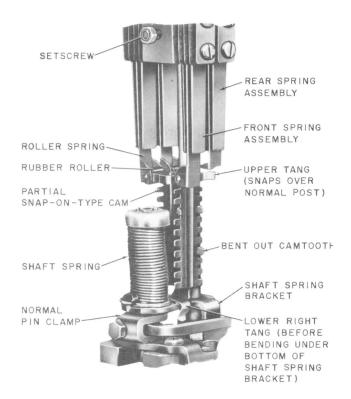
Normal Post Spring Assembly Having Rubber Rollers Operated by Partial Snap-on-Type Cam
